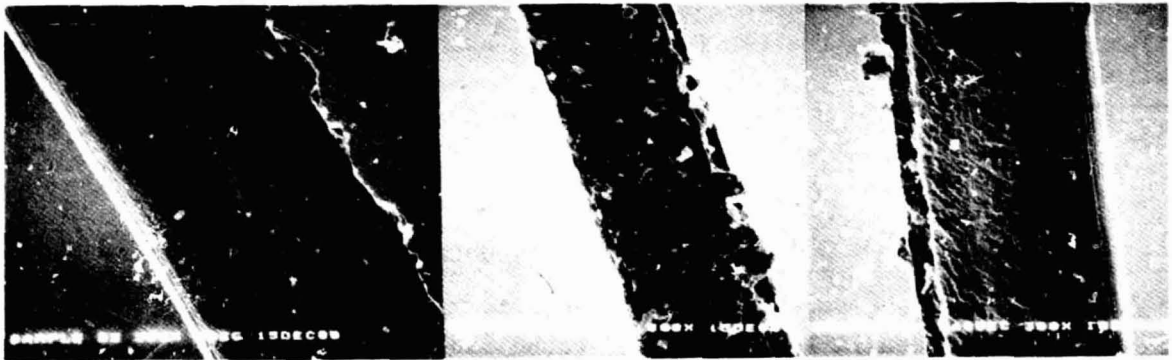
Three views of an electroformed wire showing preferential plating on cutting edge only
